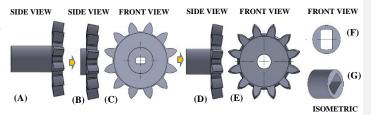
SCHEMATICS OF (A) SIDE VIEW OF PROTOTYPE EXTERNAL GEAR WITH ORANGE ARROW INDICATING CHANGE TO (B) SIDE VIEW OF FINAL EXTERNAL GEAR. (C) FRONT VIEW OF PROTOTYPE MOTOR GEAR WITH ARROW INDICATING CHANGE TO (D) SIDE AND (E) FRONT VIEW OF FINAL MOTOR GEAR.
